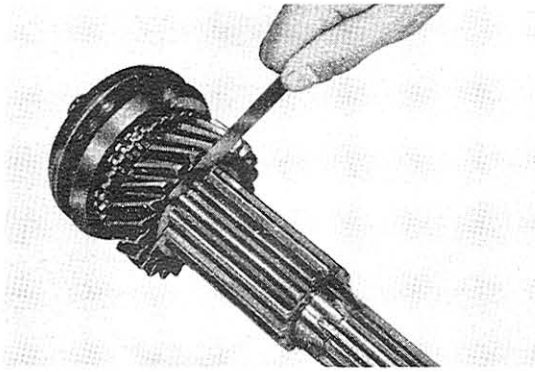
Measuring Second V0465 Gear Thrust Clearance
